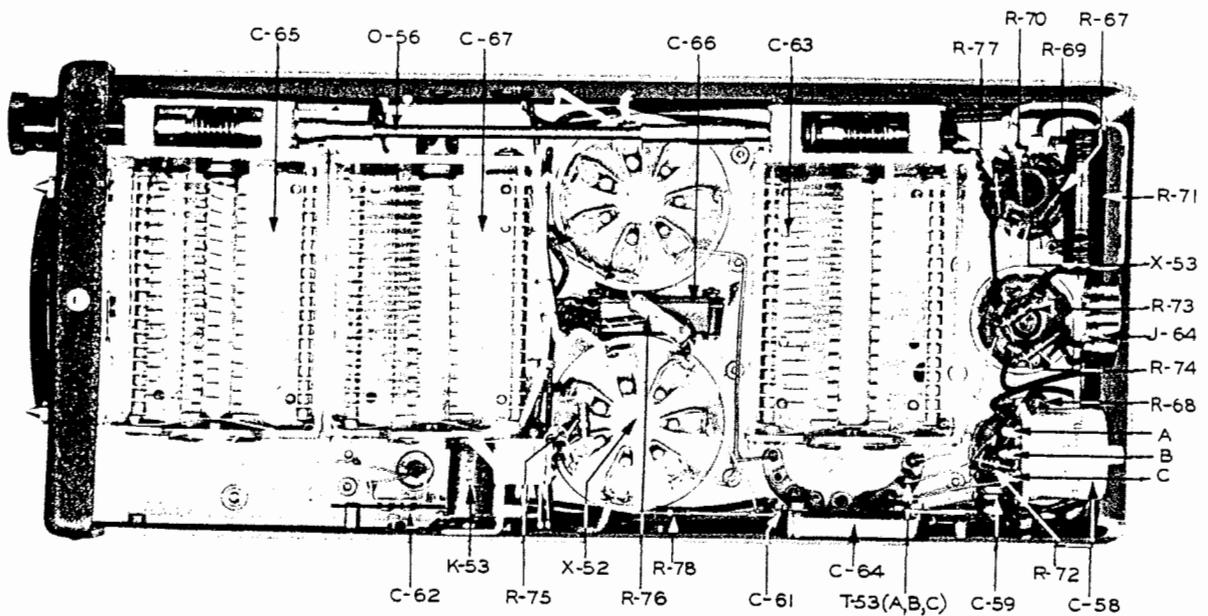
TYPICAL RADIO TRANSMITTER, BOTTOM VIEW WITH COVER REMOVED
